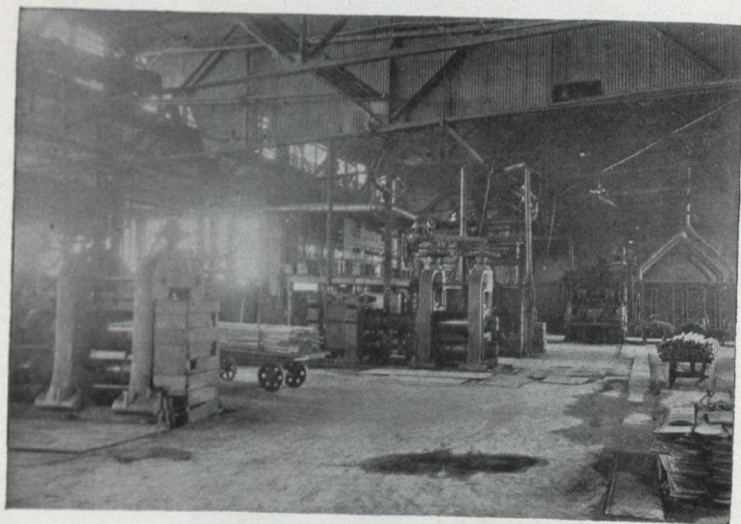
Dominion Copper Products Co., Ltd., Rolling Mill.
